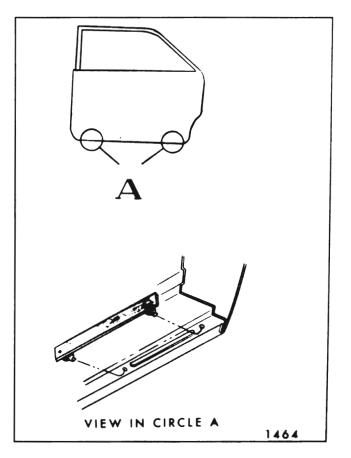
Door Bottom Drain Hole Sealing Strips
